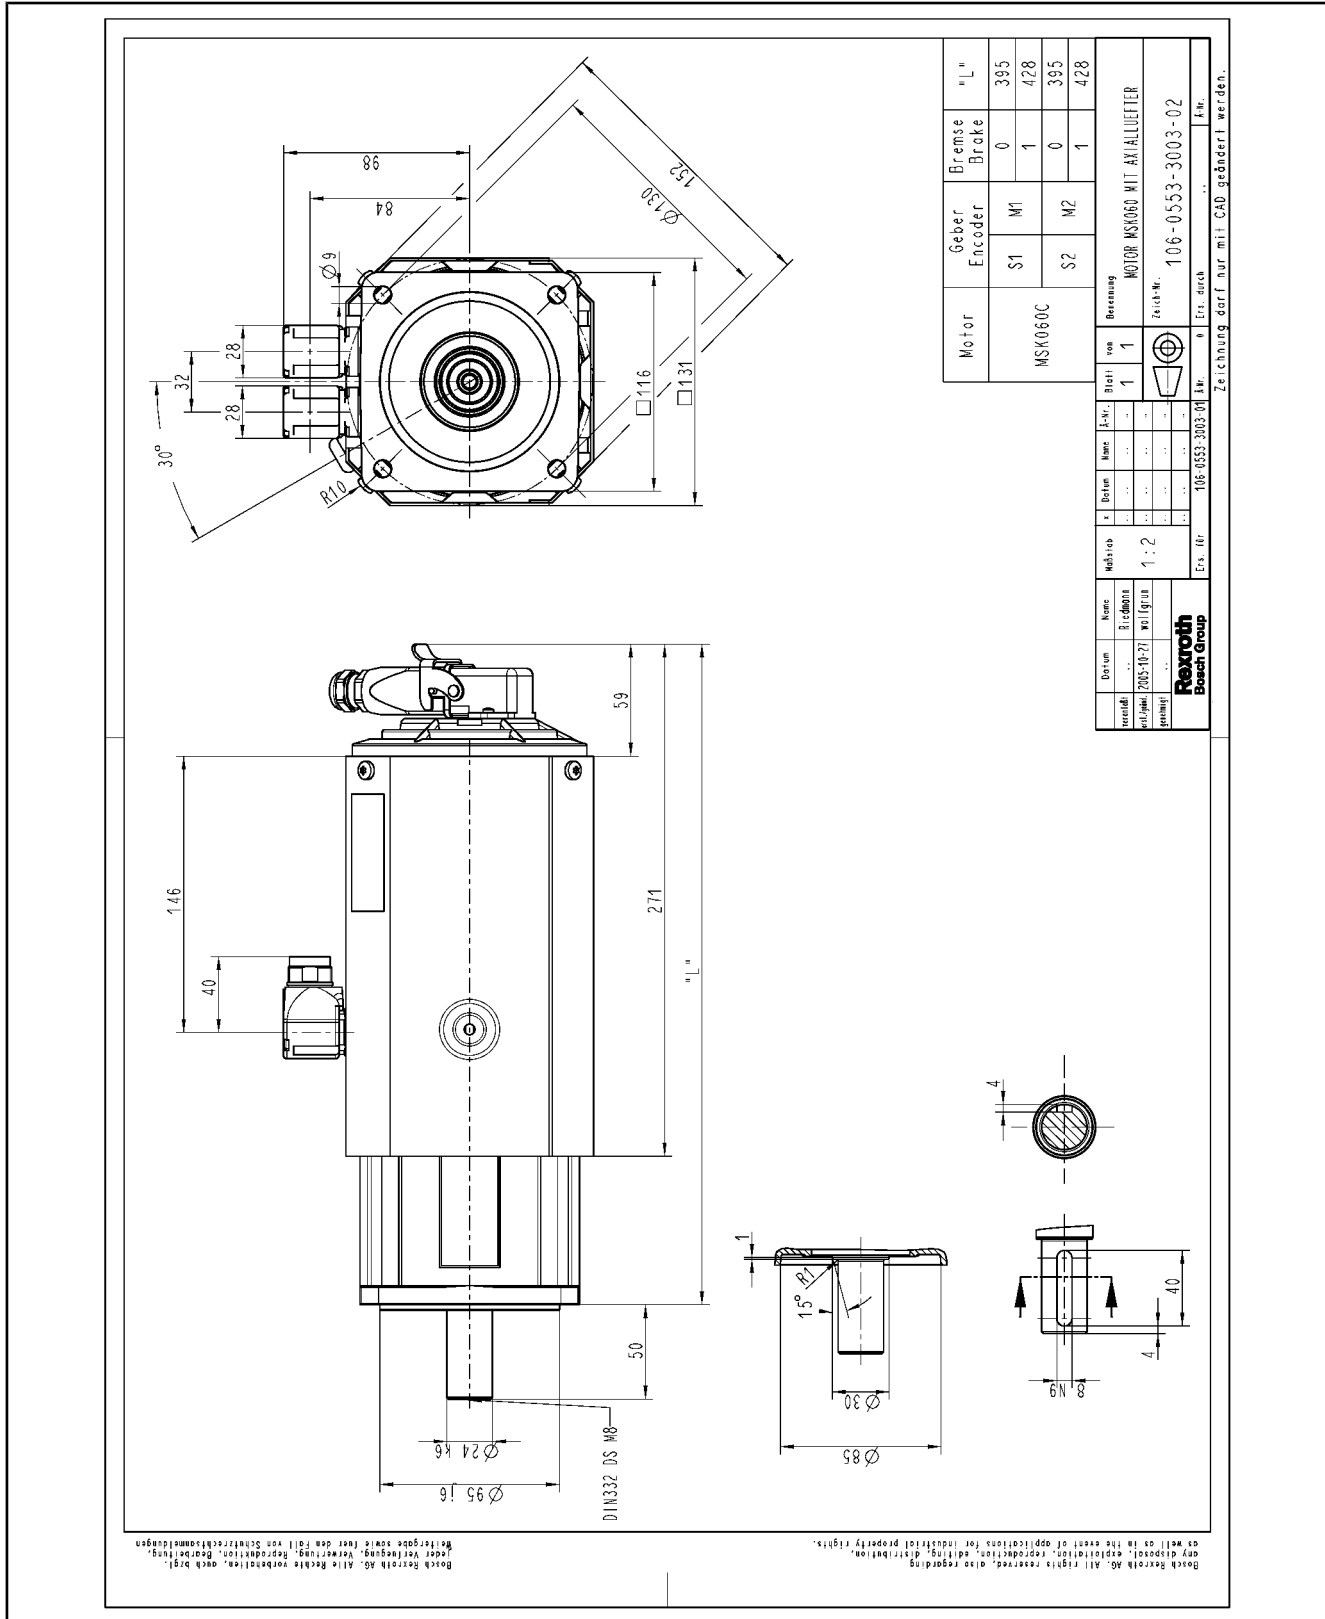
Dimension sheet MSK060 with axial fan unit
